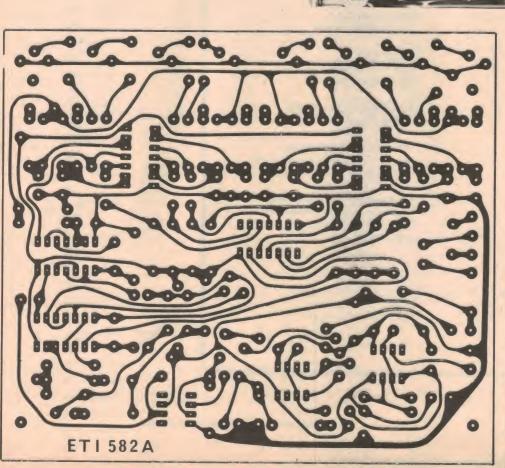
PC board layout of board 'A'. Full size 130 x 115 mm.
